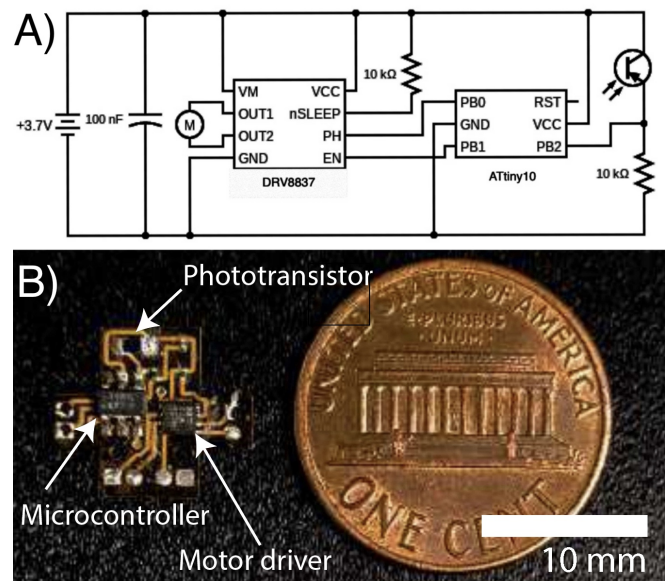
A custom circuit board was designed for the microrobot. The schematic is shown in the top panel (A), and a photograph of the circuit board next to a US penny is shown in the bottom panel (B).
